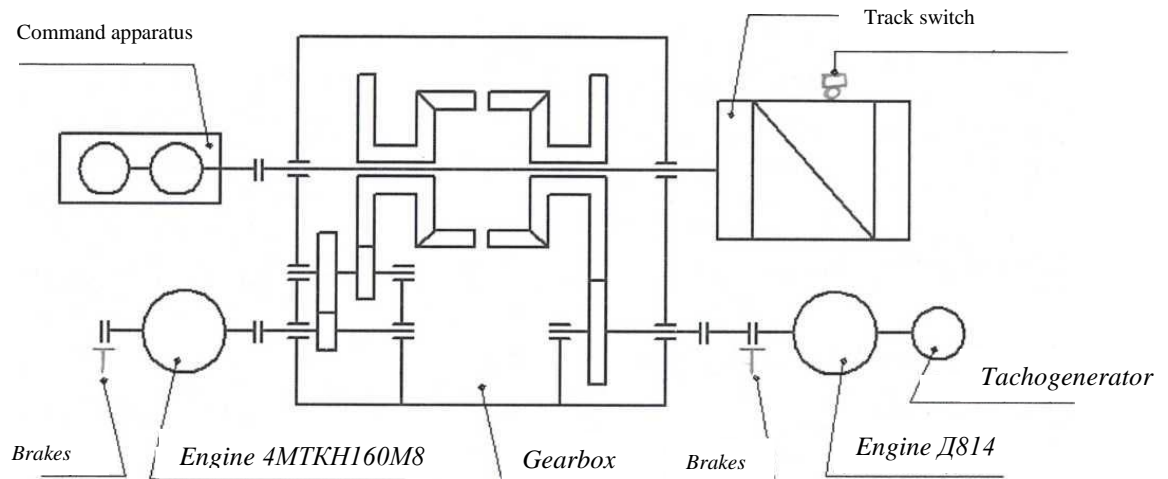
Kinematic scheme of the lifting mechanism of the measuring lance
